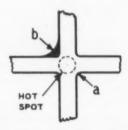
Section crossing enlarges mass at a which retards cooling. Excessive fillet at b further slows the cooling rate of metal.
